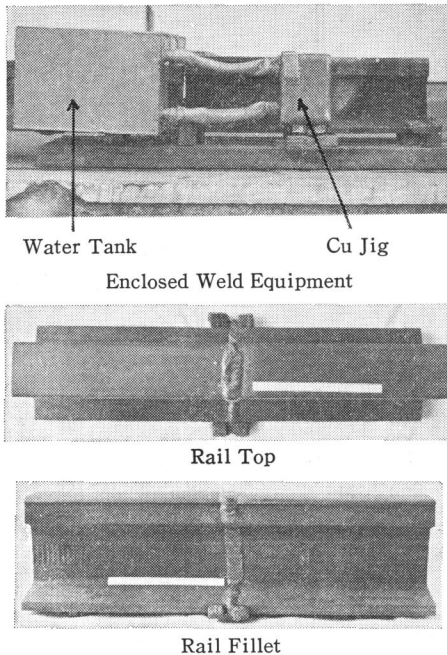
Enclosed Weld Equipment and Appearance of welded joint
